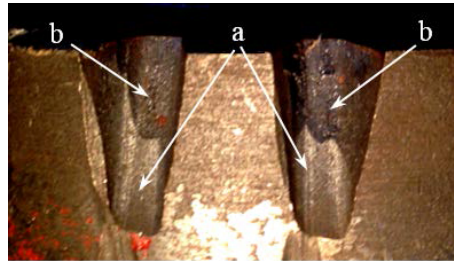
The image of transition surface in the gap of partially machined gear: a – tooth mark from the present cutting step; b – tooth mark from previous cutting step
